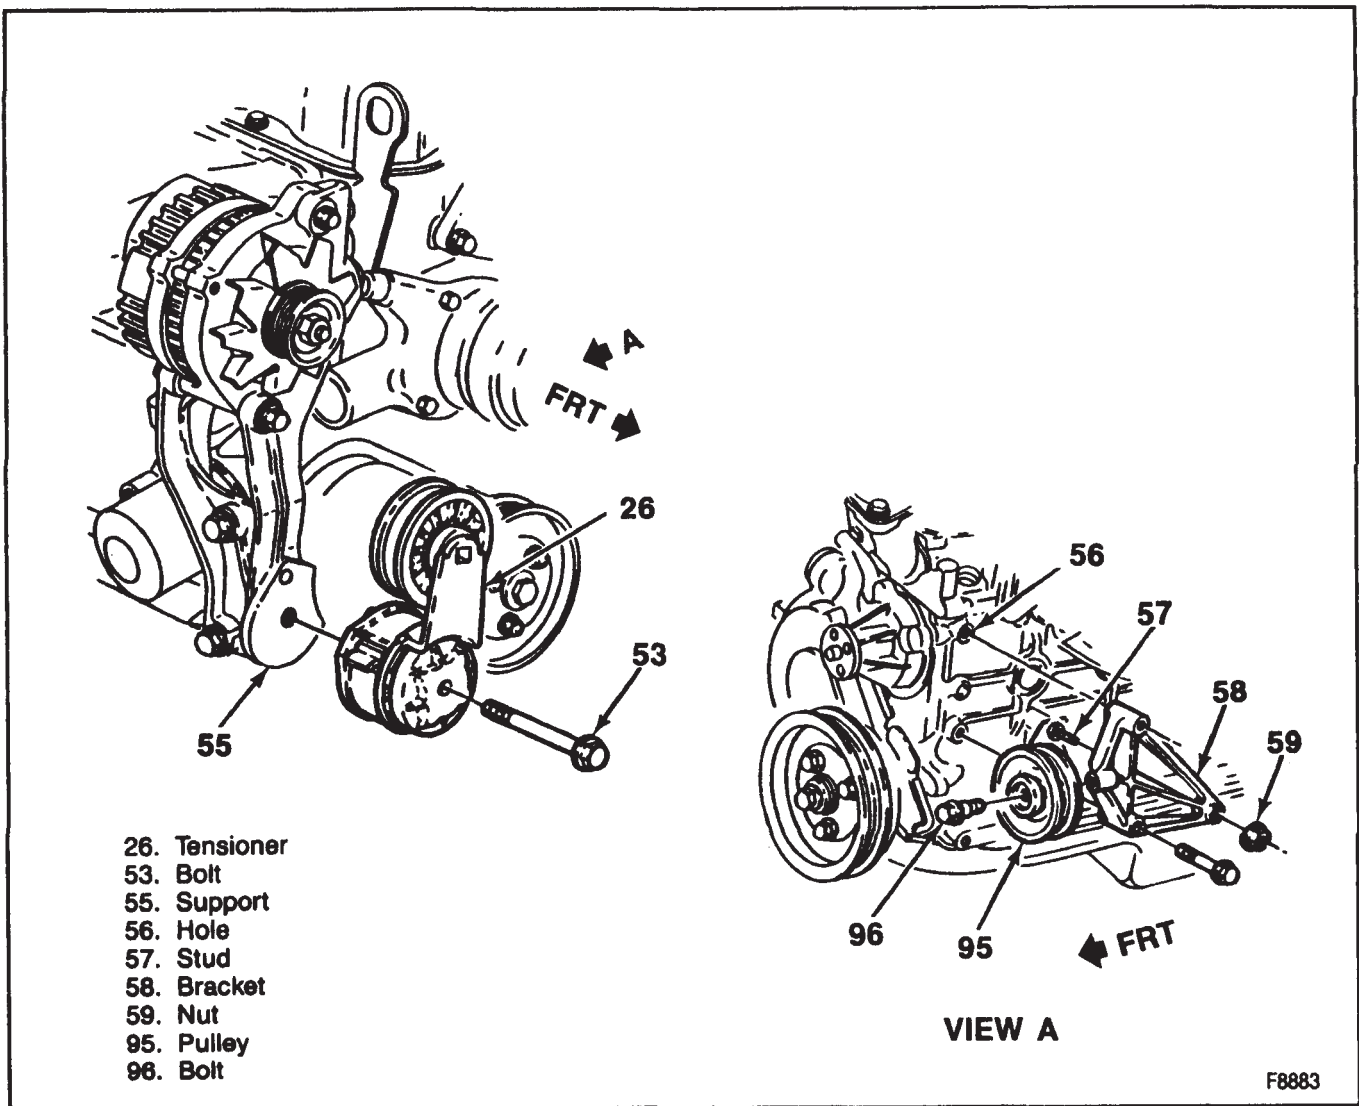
Belt Tensioner and Idler Pulley (2.5L Engine)
